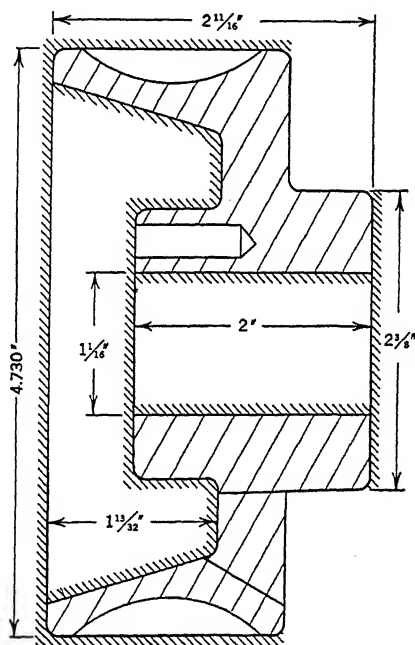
Surfaces machined with Carboloy indicated by shaded outlines.
